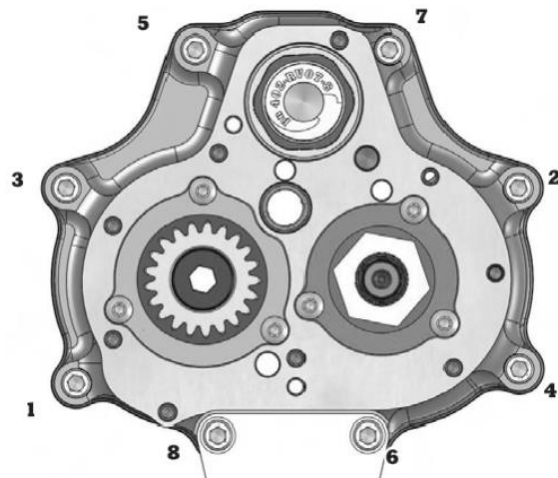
| BEARING DOOR TORQUE SEQUENCE
